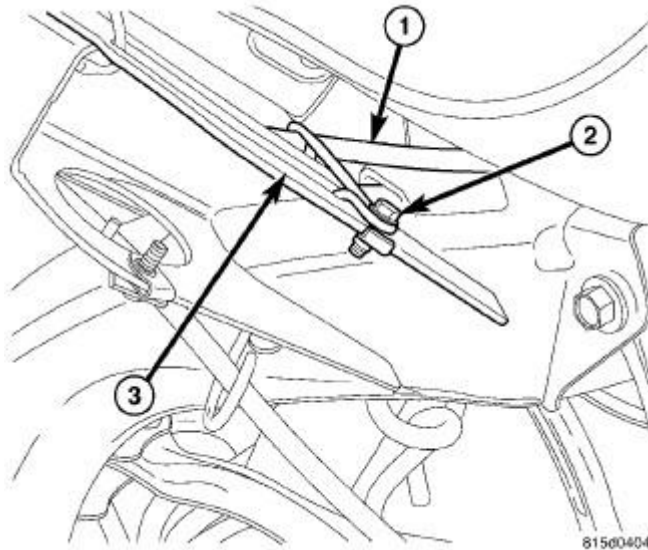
FRONT CABLE AT LEFT FRONT OF CROSSMEMBER
